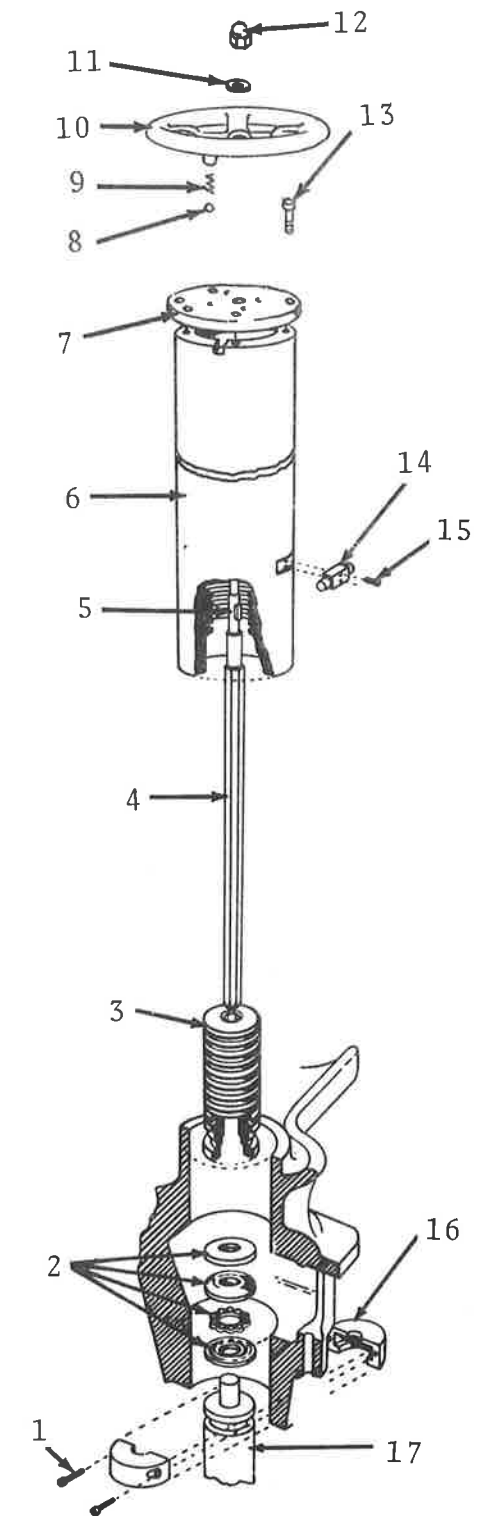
Beam Spindle and Connecting Parts - Exploded View
